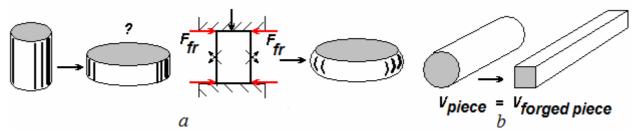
Barrel shape of a forged piece is caused by friction forces which act between the piece and a hammer block (a); volumes of a piece and a forged piece are equal (b)
